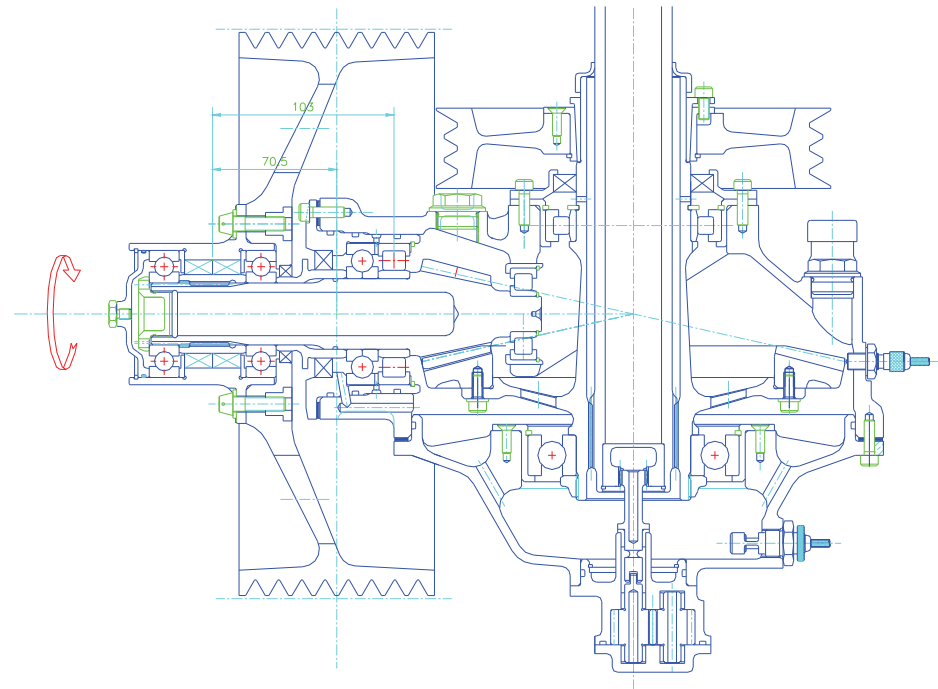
MGB Assembly (P/N E1.63.001.102)
